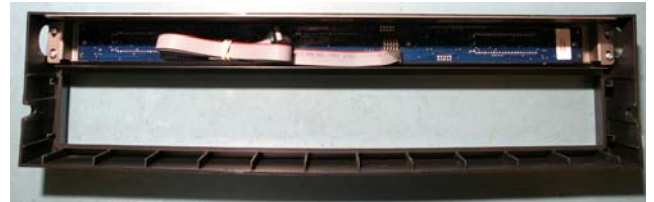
Two screws in each side of the display assembly secure it to the bezel. A terminated ribbon cable attaches to the back of the board on the display assembly. A bare ribbon on the front of the board attaches it to the display assembly.
